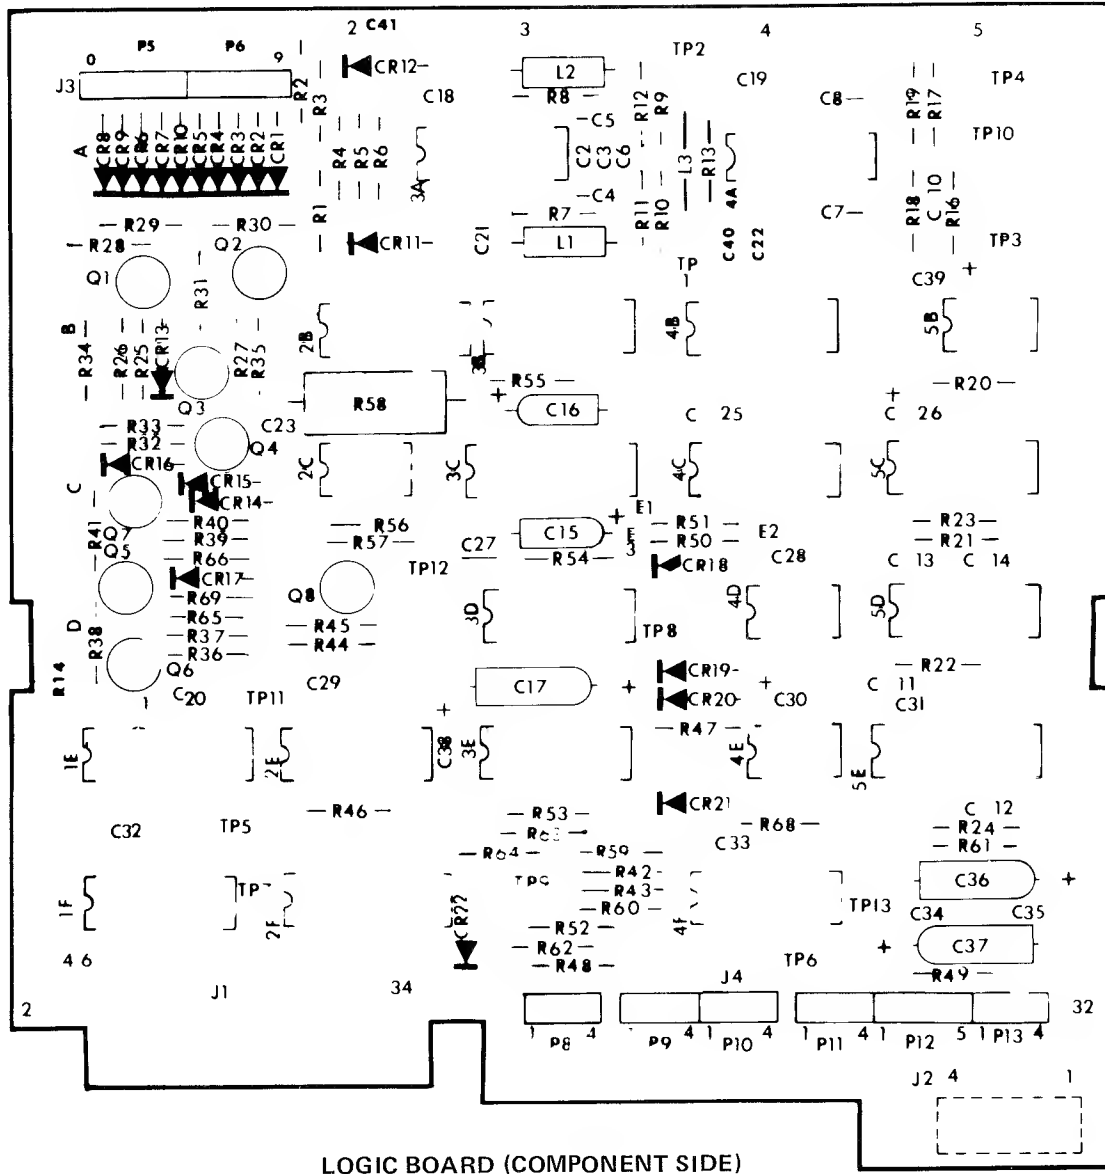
PC BOARD COMPONENT LOCATIONS.
